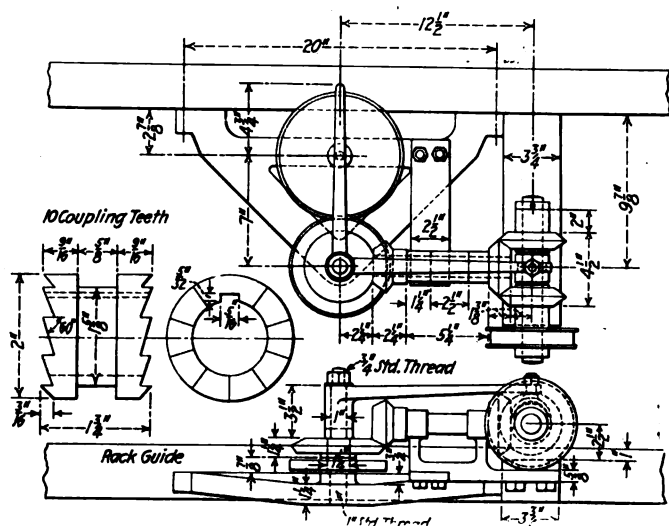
Reversing mechanism of attachment for grinding the radii of valve links
